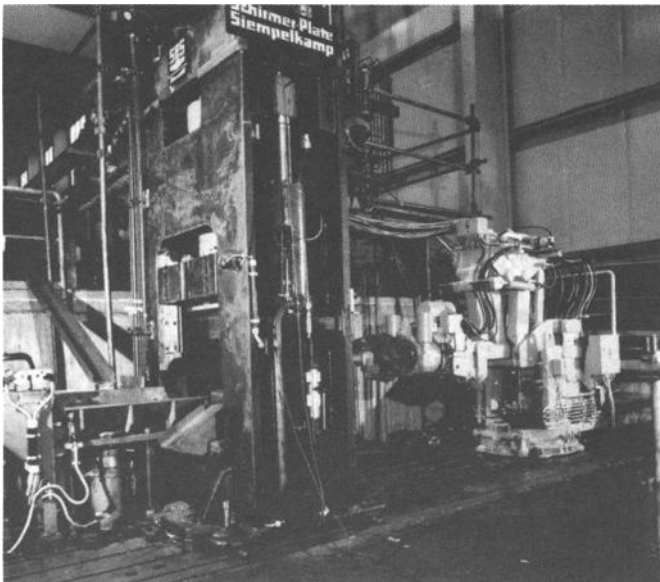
Automatic preform forging press. (Courtesy of Schirmer-Plate-Siempelkamp Hydraulic Presses.)
